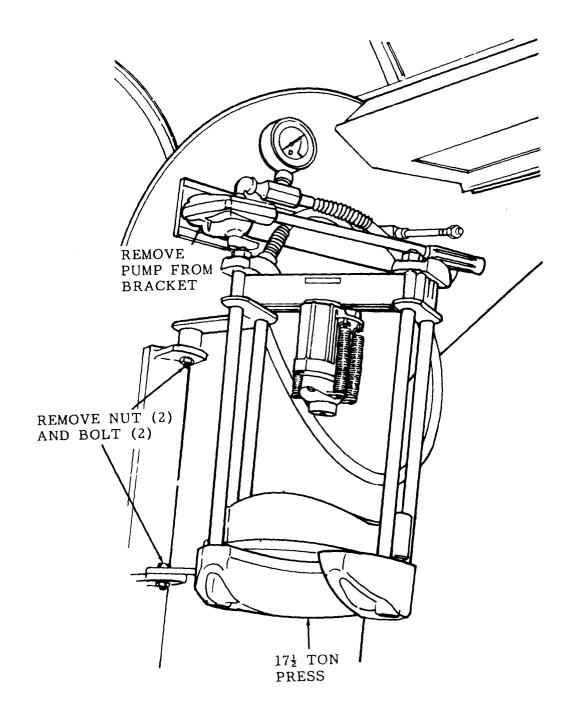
17½-Ton Press Frame, Removal and Installation.
